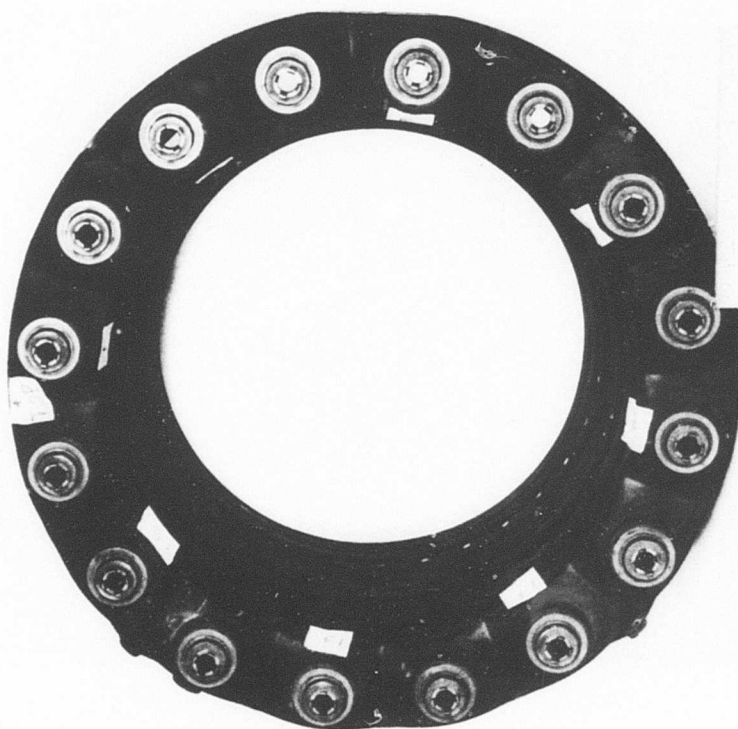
PLT 27 Combustor Liner, Serial 0K001, After Completion of Tests, View Looking Forward.
